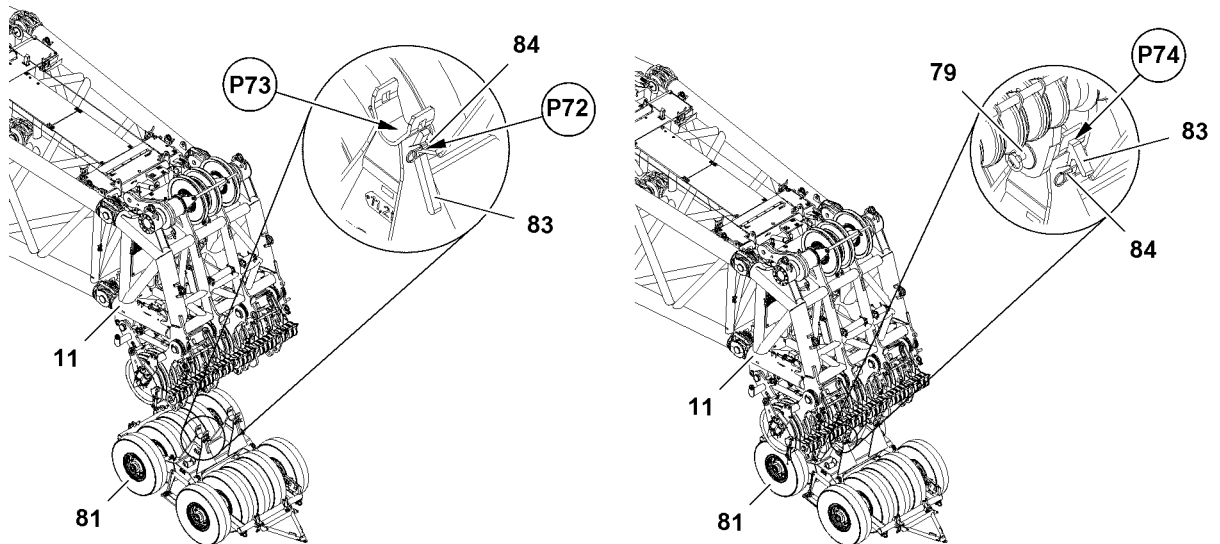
Assembling the roller cart — Placing the L-end section on the roller cart
